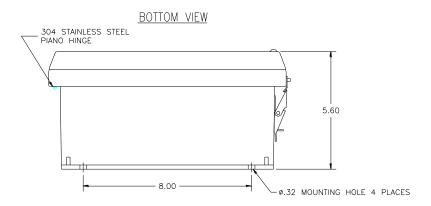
Enclosure Mounting Footprint (Vynckier)
